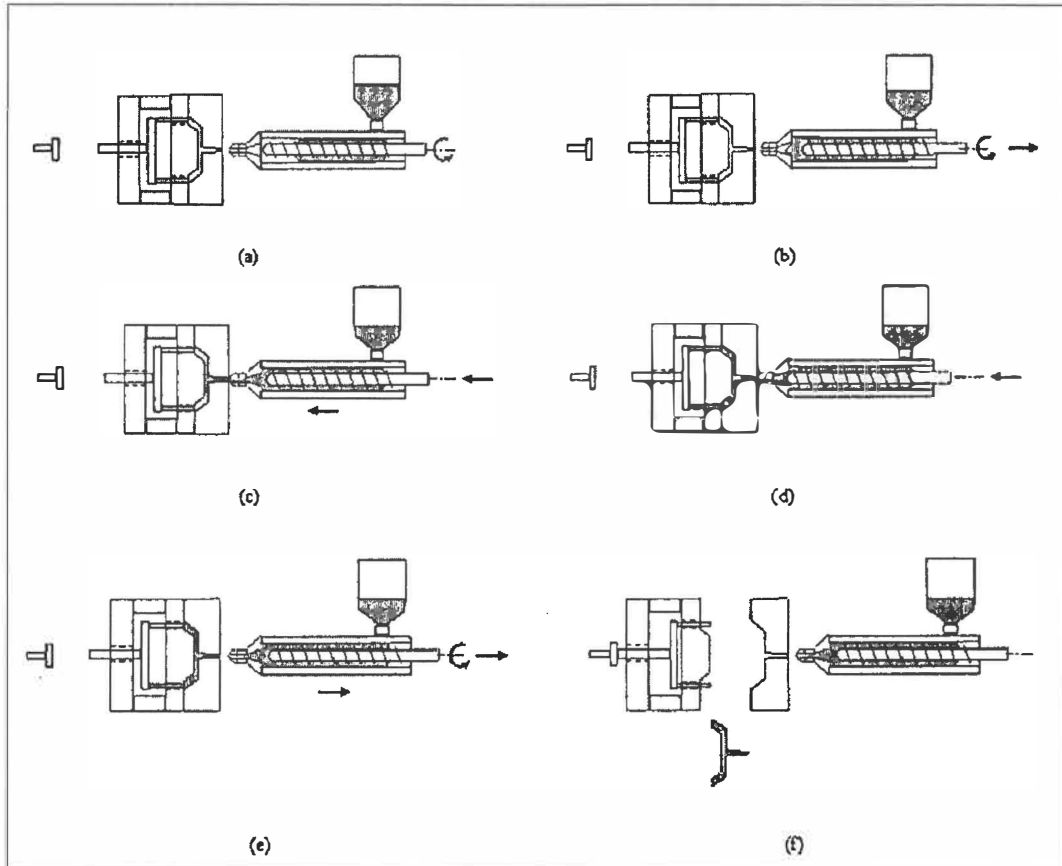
Basic operations of the injection moulding cycle: (a) start up; (b) screw back 1; (c) injection; (d) hold-on; (e) screw back 2; (f) cooling and ejection [61].
